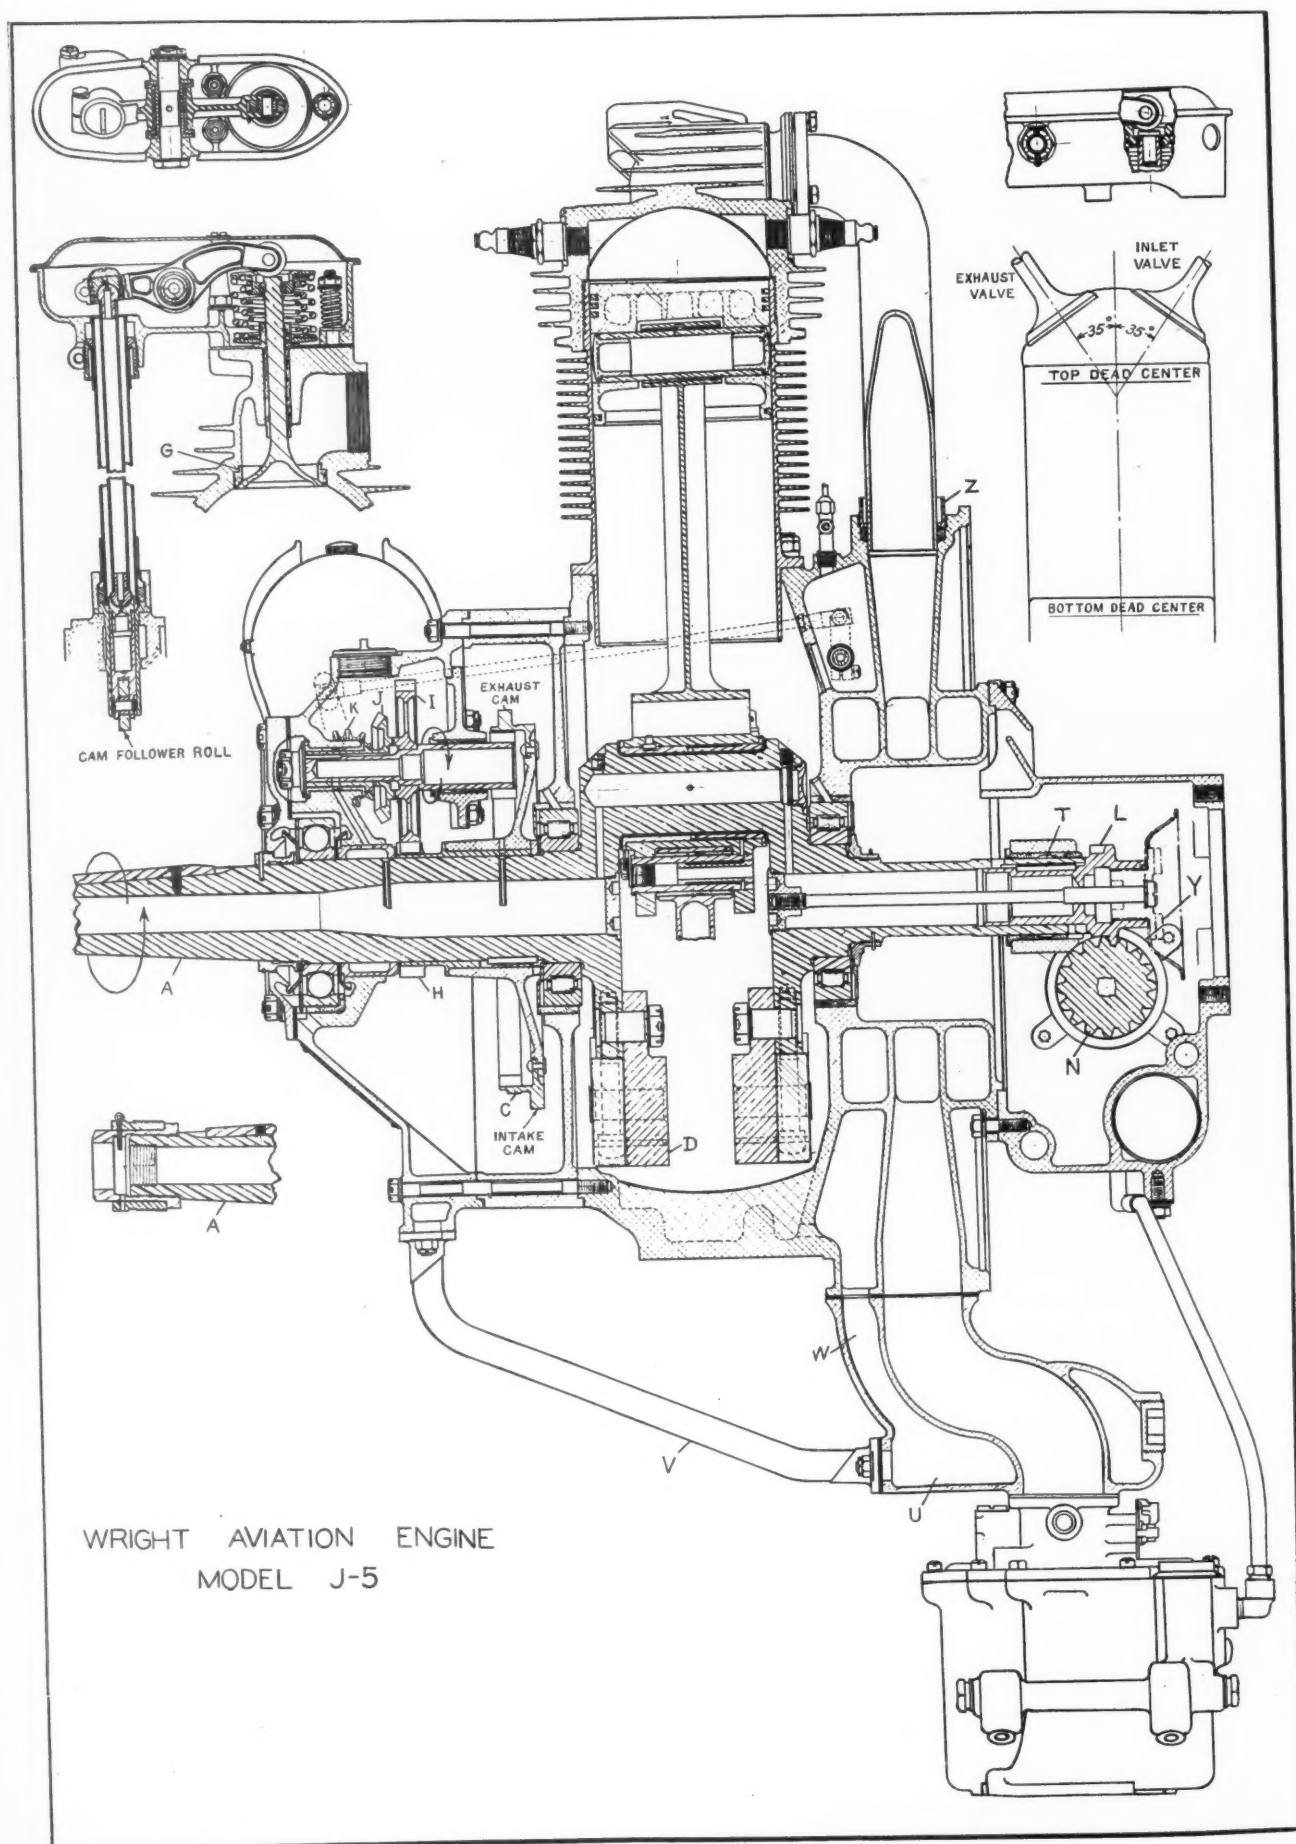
Transverse Section Assembly of 200-horsepower Wright "Whirlwind" Engine
